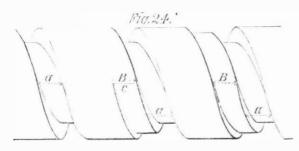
represents a thread or screw during the above described process of cutting. a a a is the groove or space taken out by the cuts before the tool was moved; B B represents the first cut taken after it was moved; c is the point to which the cut, B, is supposed (for the purpose of this illustration) to have traveled.
